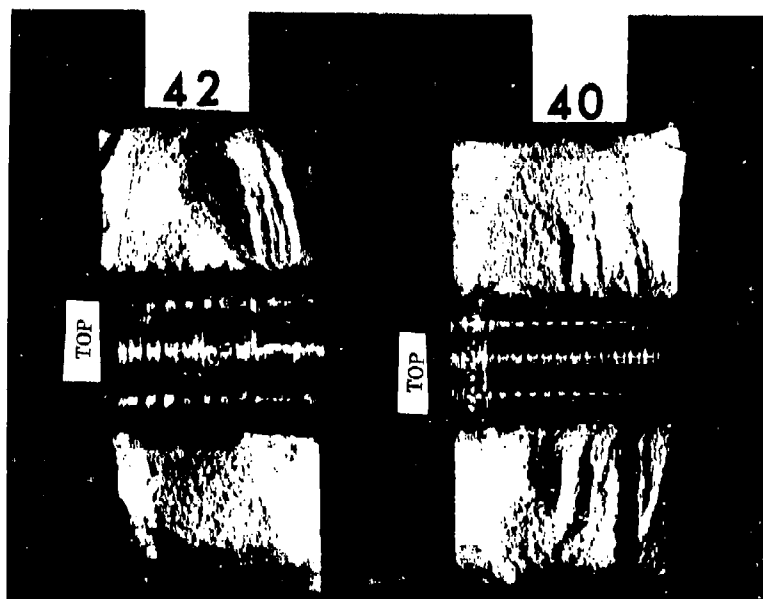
Close-up of Fatigue Failures of Specimens with Groov-Pin and Rosan 3/8-24 Size Inserts. Inserts Installed by AFML. Torqued Bolts in Inserts During Tests.
